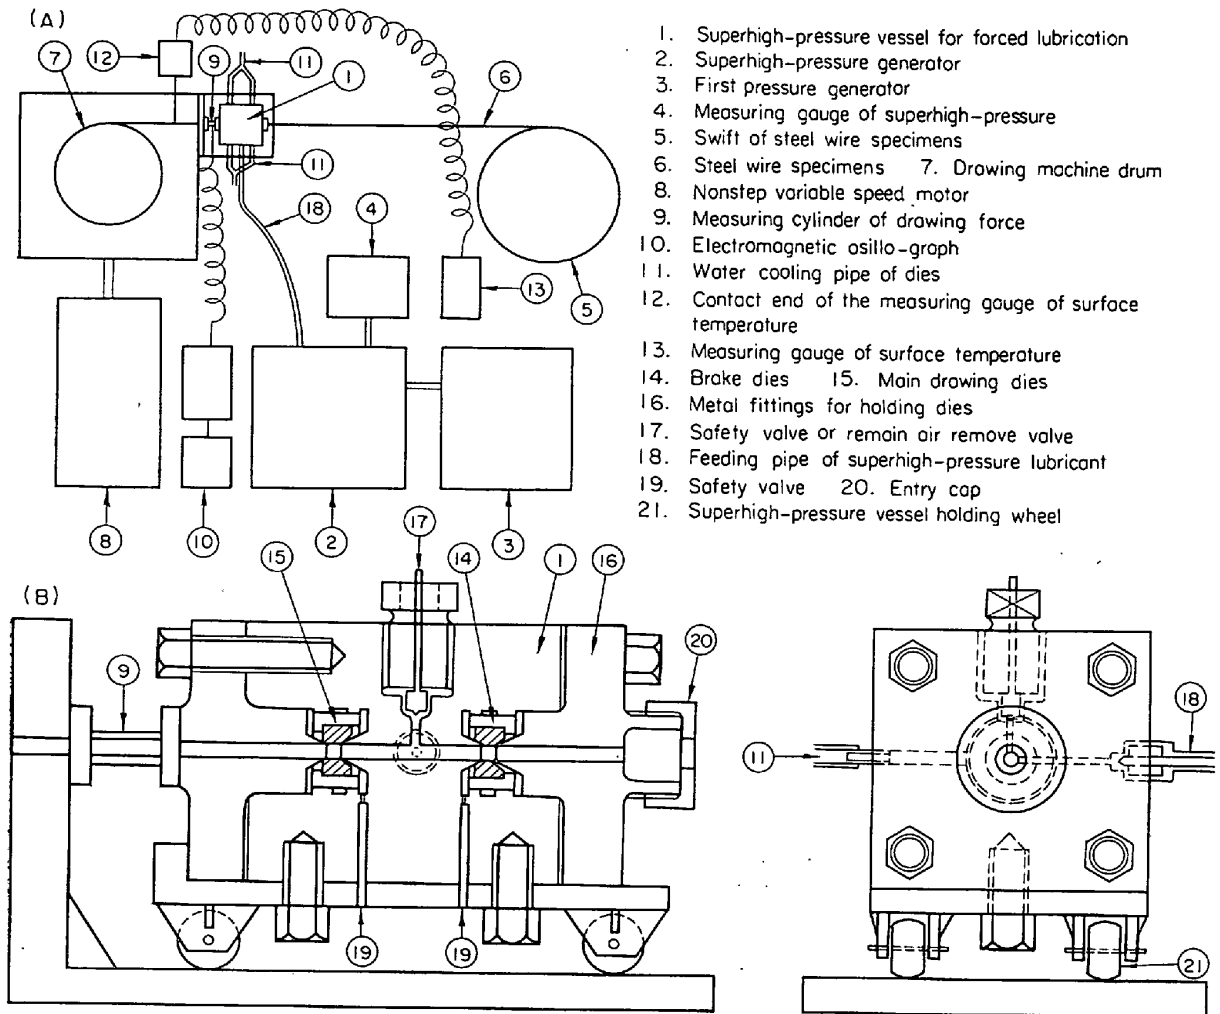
(A) Schematic arrangement of experimental forced lubrication drawing apparatus.
